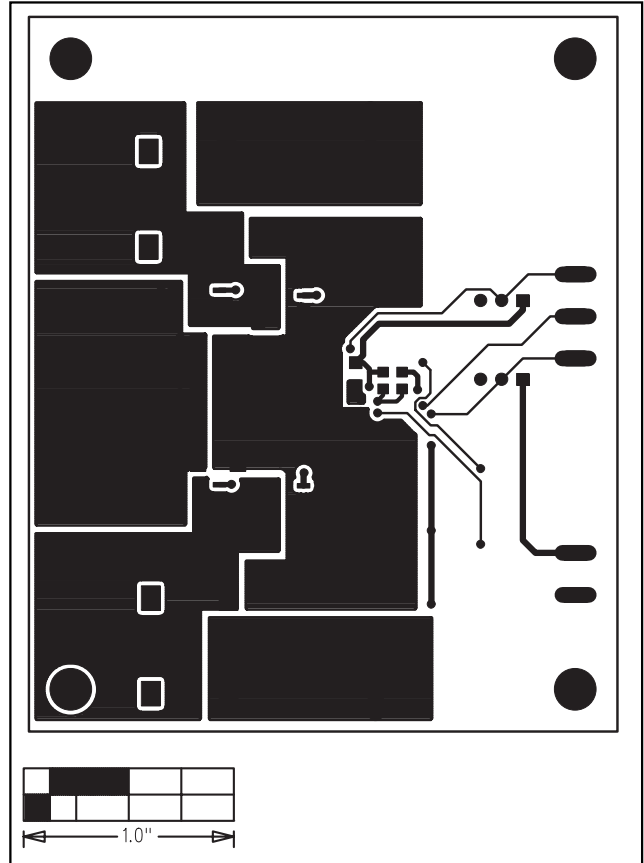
MAX1858 EV Kit PC Board Layout—Component Side
